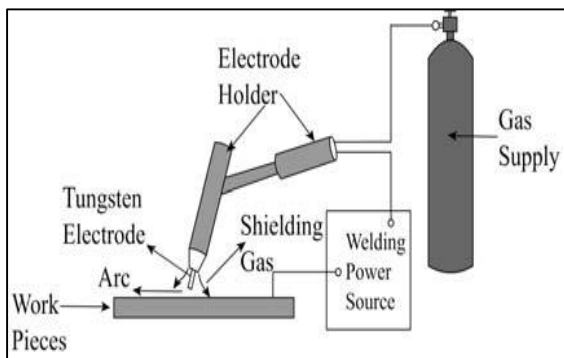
Schematic of tungsten inert gas welding process
